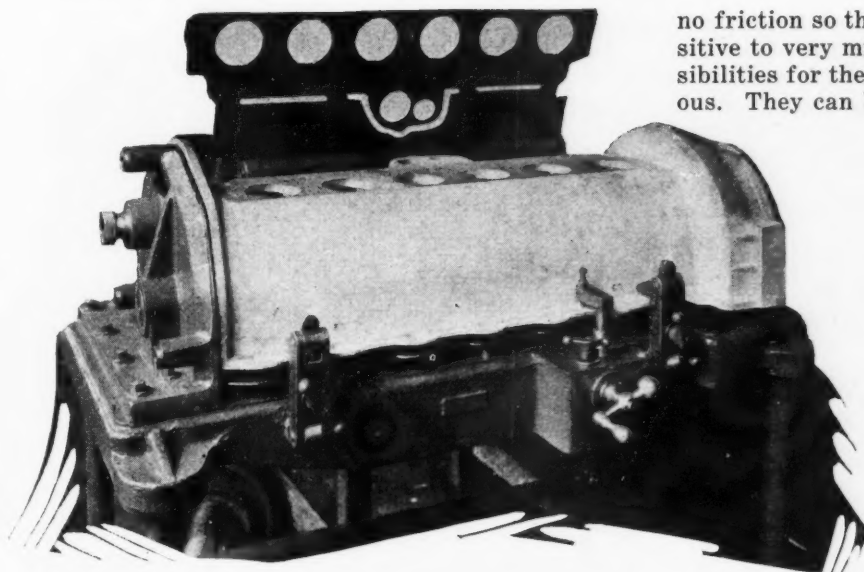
Rough crankcase castings are checked with this fixture to avoid machining incorrect pieces
